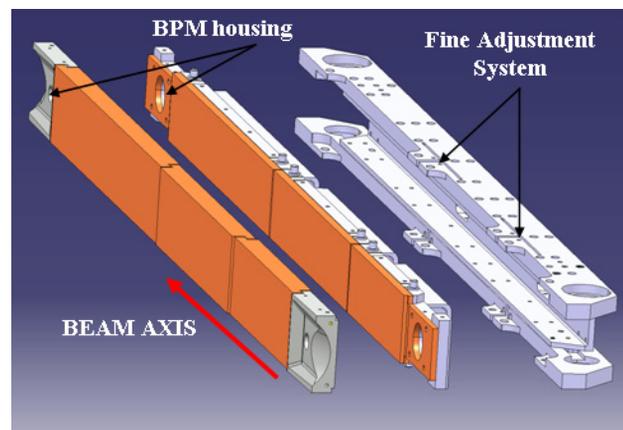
Phase II jaw assembly. Modular design including (from left to right) three-sector jaw, three-sector cooling circuit and back-stiffener with fine adjustment system.
